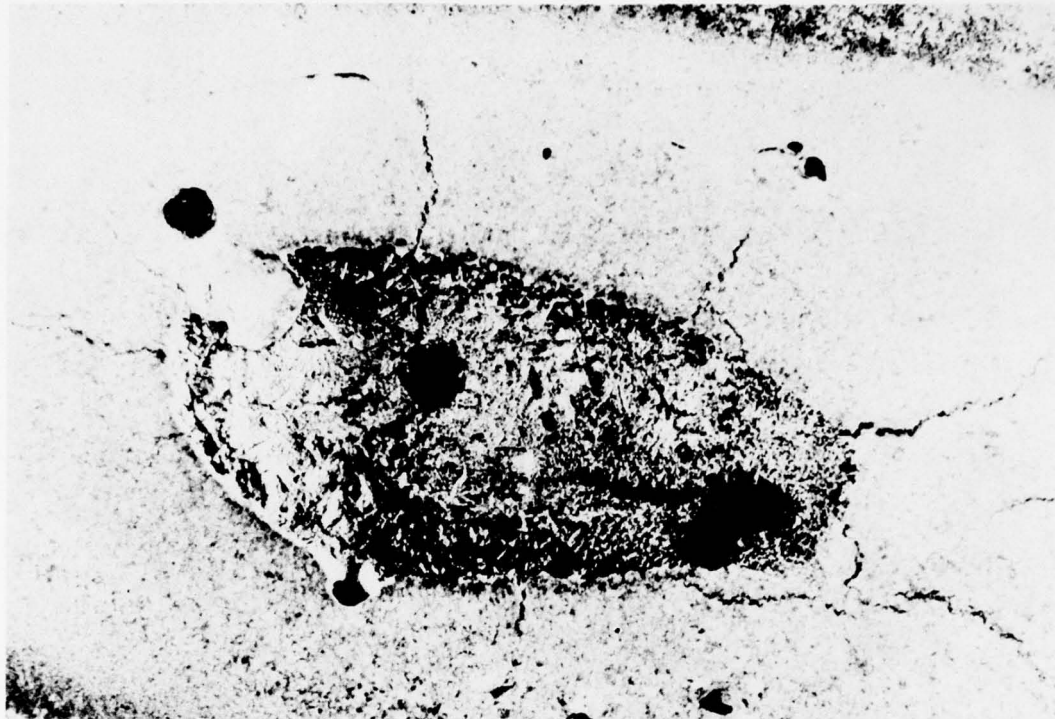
Weld arc strike; small cracks extend from a solidified arc pool approximately 0.2 in. (5 mm) wide. Residual stress fields of close to yield level act across these cracks.
